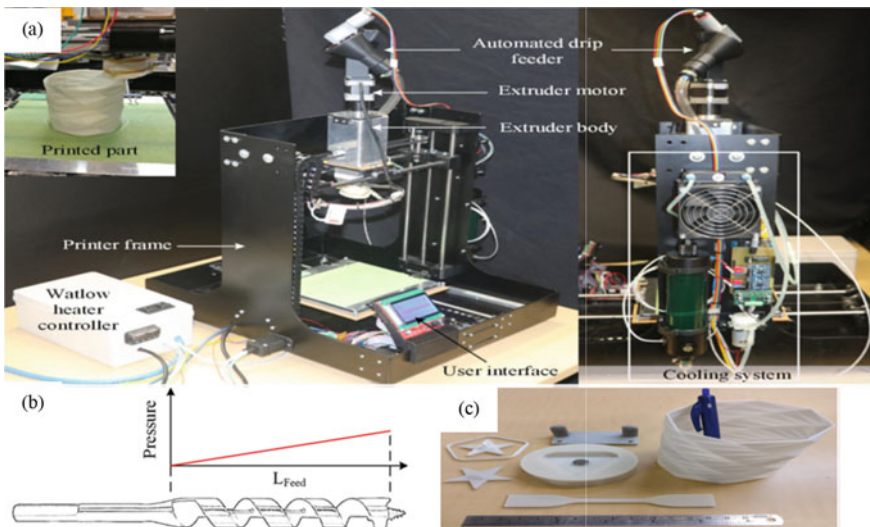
a Complete setup of extrusion system for printing of biopolymer paellets; b Auger/drill bit; c Printed parts [25]
